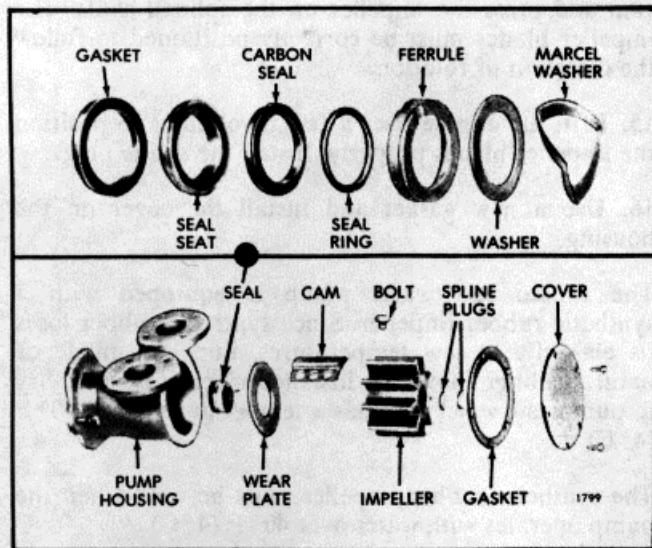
Raw Water Pump Details and Relative Location of Parts
